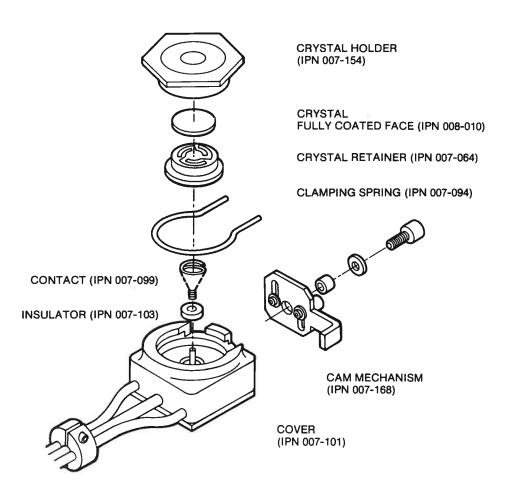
Bakeable Crystal Sensor (Exploded)
